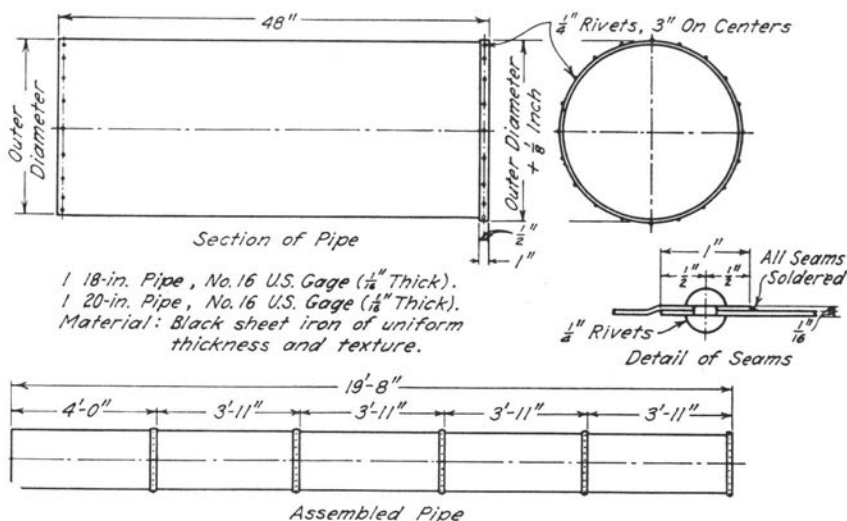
THIN-WALLED PIPE FOR COLLAPSE TEST
